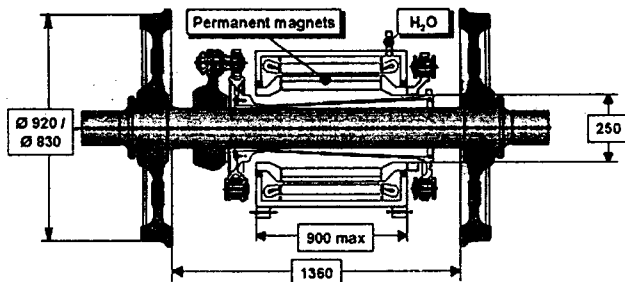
Geometrical limits for PM motor design (dimensions in mm)
